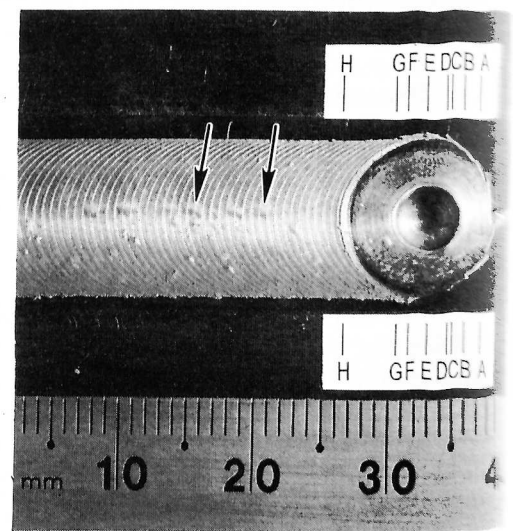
Blisters observed on the weld bead of 7475 after postweld annealing and the locations of cross sections examined.
